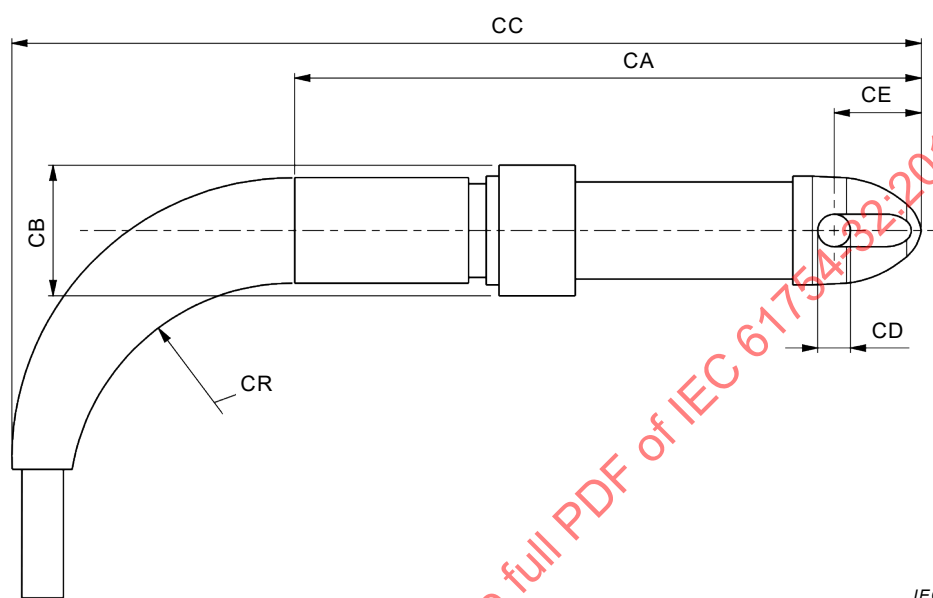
Fixed ferrule interface with a pulling rope protection cap
